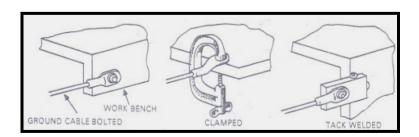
Method of attaching the ground cables: bolted/ clamped / tack welded.
